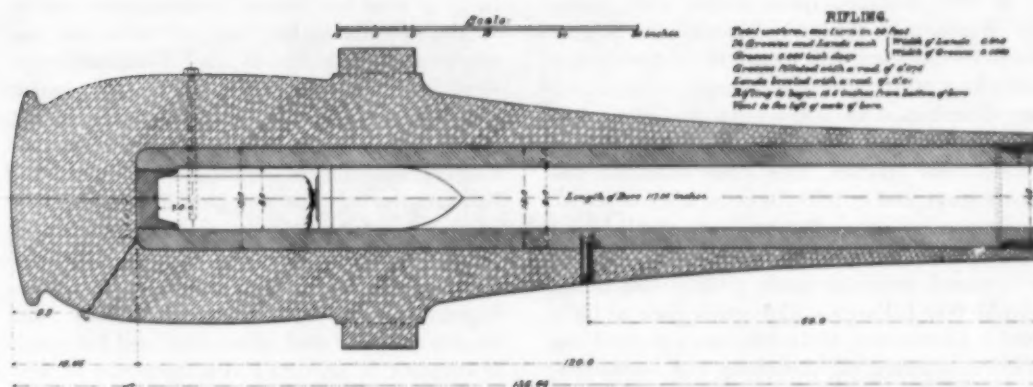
8-In. Muzzle-Loading Converted Cast Iron Rifle With Muzzle-Inserted Steel
